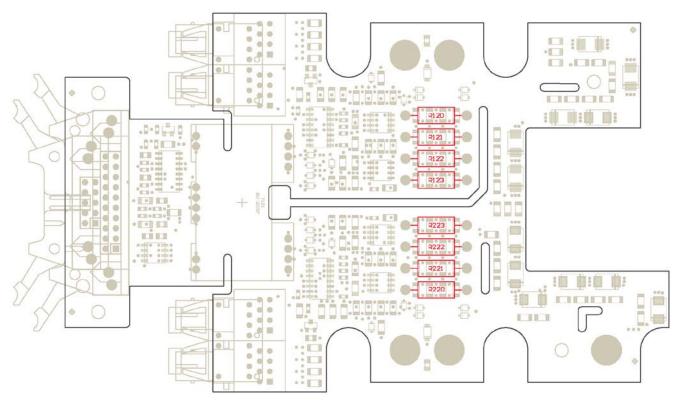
Assembly drawing of 2SP0320 with highlighted gate resistors
